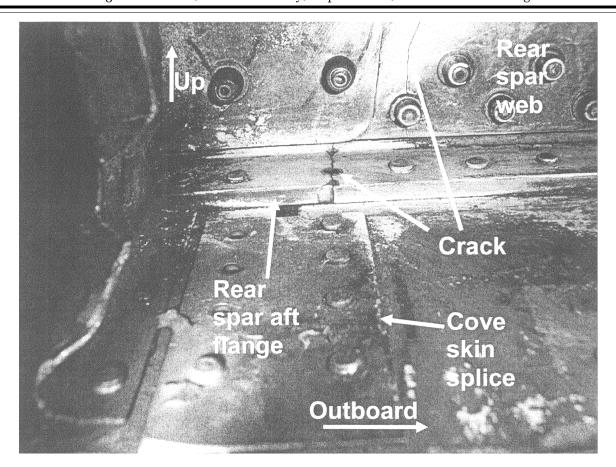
Closeup view of R/H wing rear spar cracks at BL 114 area looking forward (The inboard flap is removed in this figure, but removal of the flap is not required to do the inspection).
